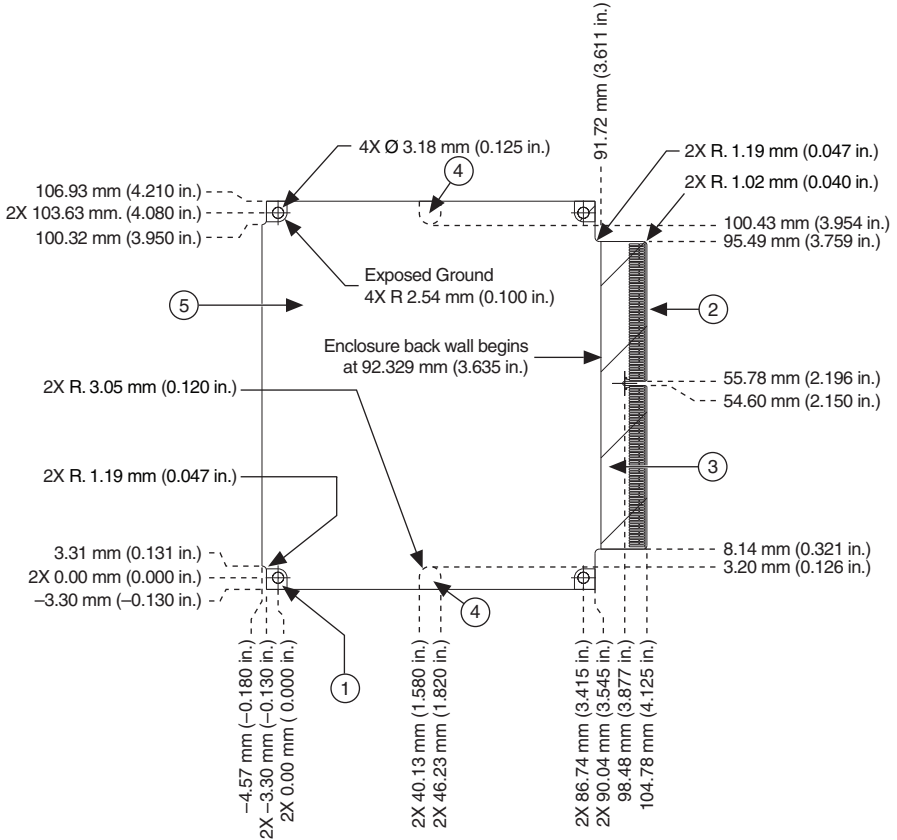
PCB Notches Required for 1.0 Enclosures
